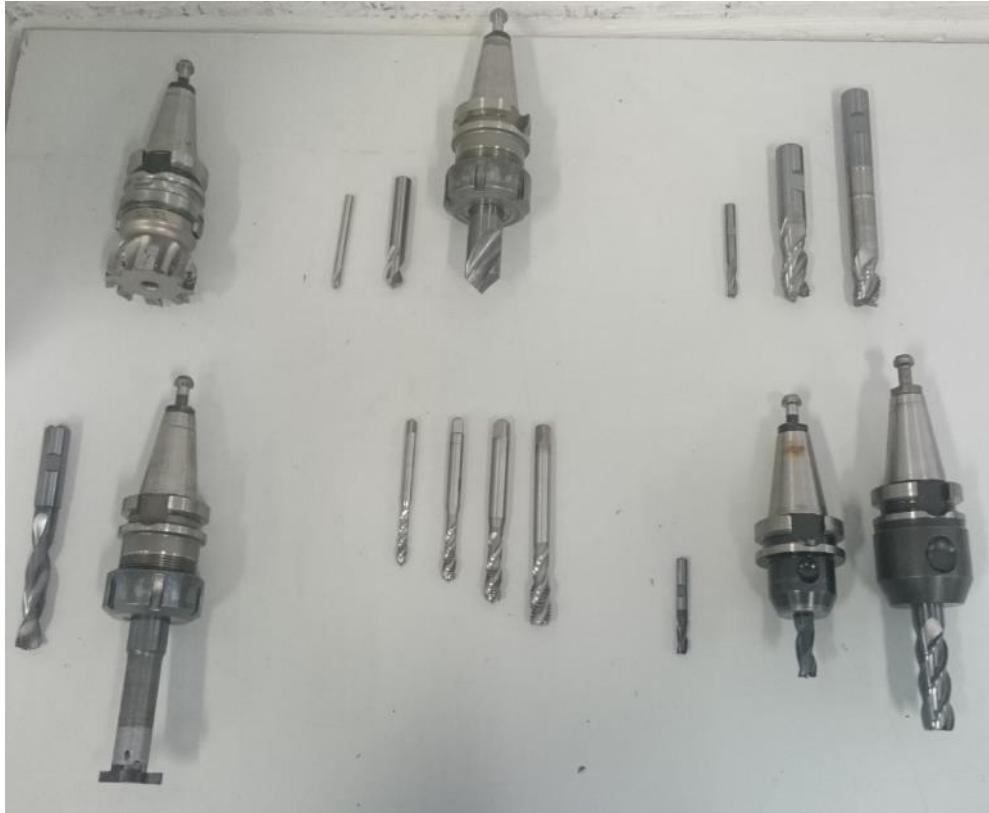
Sample of drilling and milling tools used in the machining of the parts
